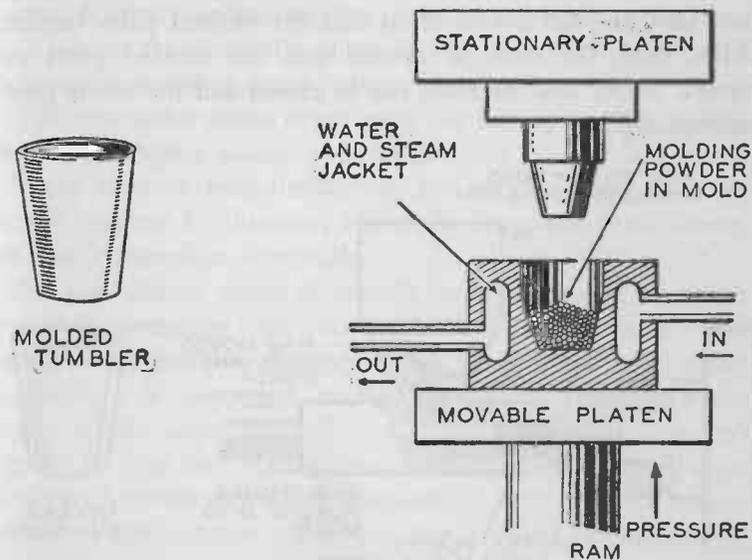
B.—Molding a Thermosetting Plastic. Heat and heavy pressure, the latter supplied by a hydraulic press, are required. The mold is for making the molded tumbler shown at the left. The portion of the mold called the cavity is shown in section.
